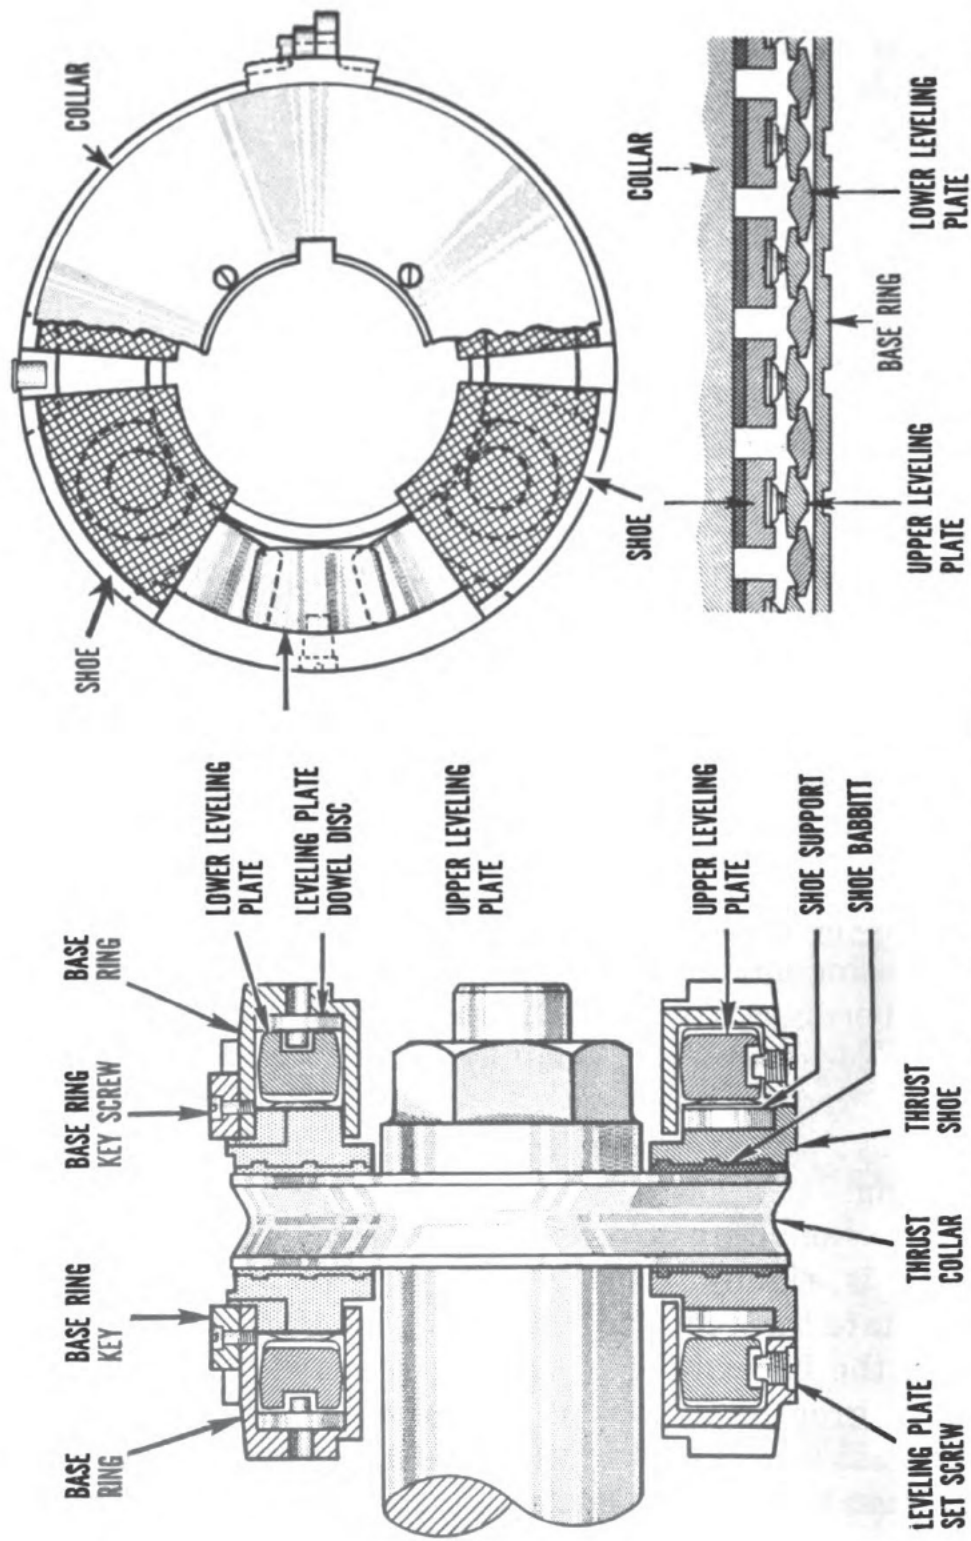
Kingsbury pivoted-shoe thrust bearing.
